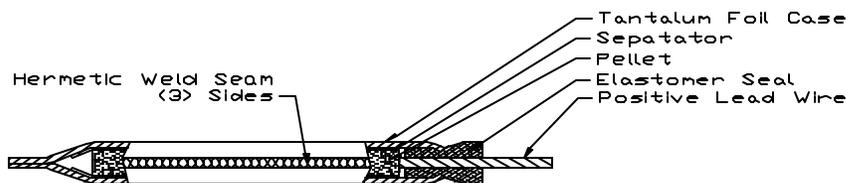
Drawing of the prototype capacitor showing a partial cut-away view. The overall dimensions are 19mm X 18mm X 1.4mm.
